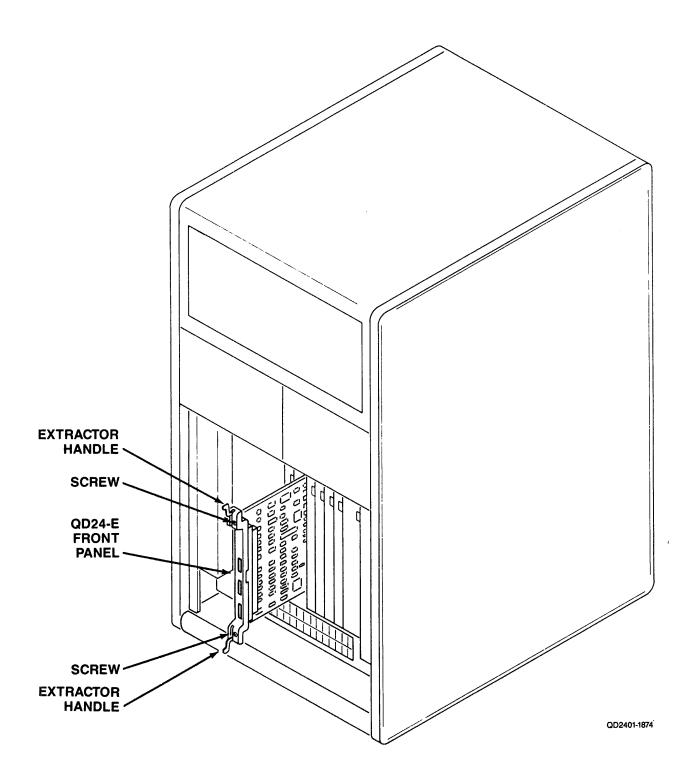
Mounting the QD24-E PCBA in a MicroVAX 3500/3600
